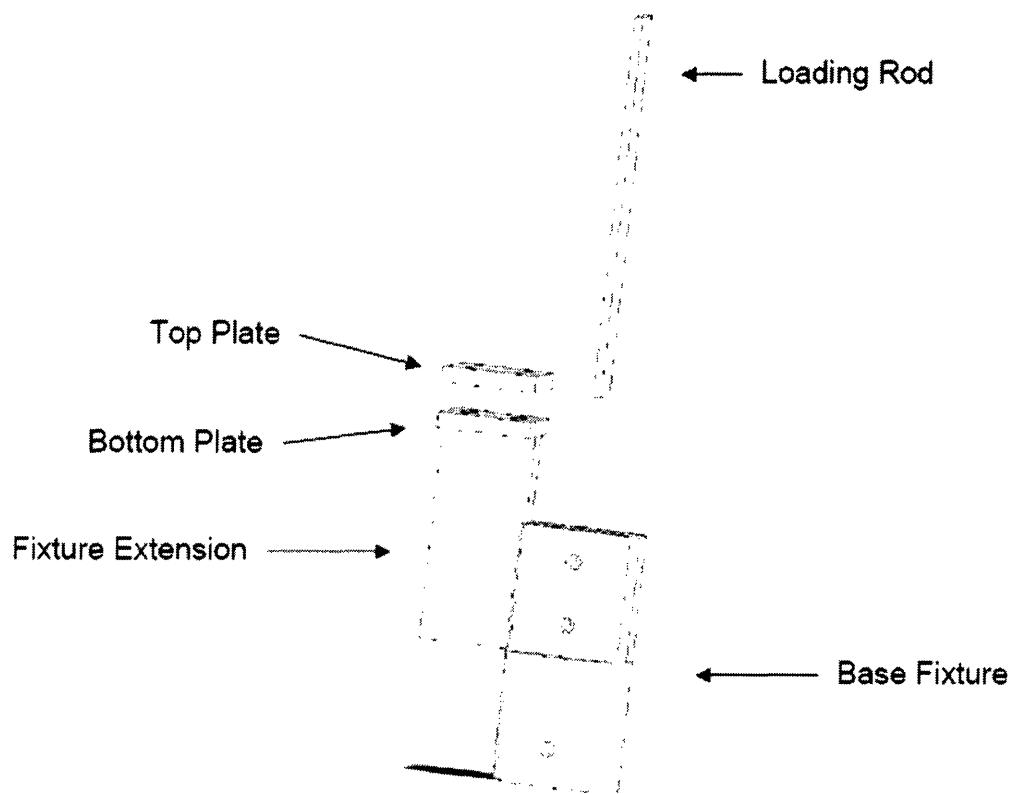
Custom fixture used to apply Izod type bending Quasi-Statically.
